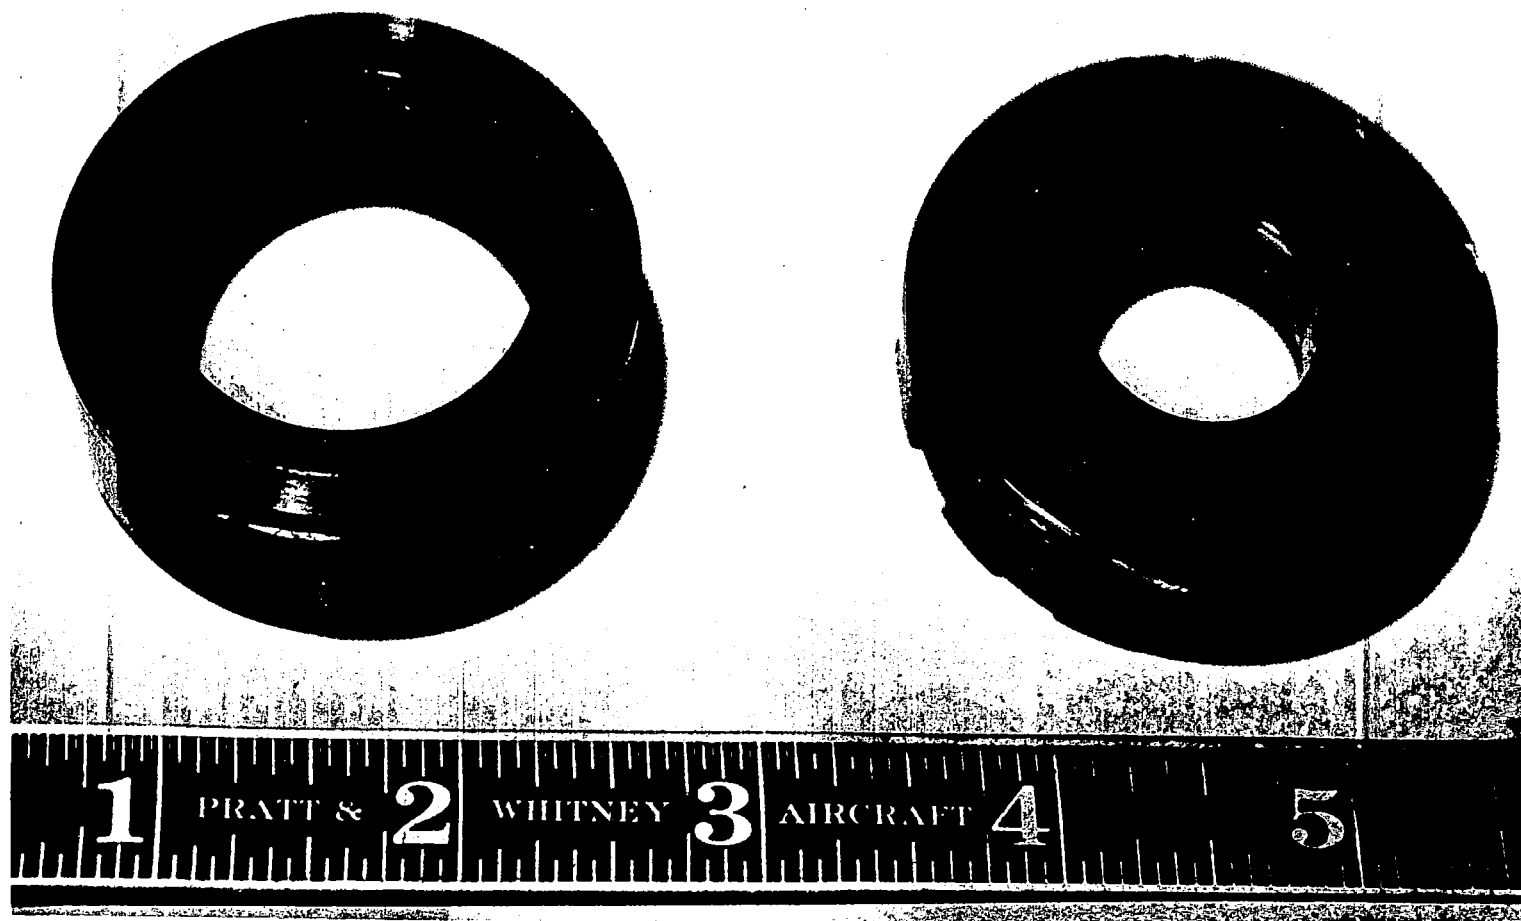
Turbine-Compressor Seal and Sealplate after 500 Hours of Test and Cleaning CN-8895
